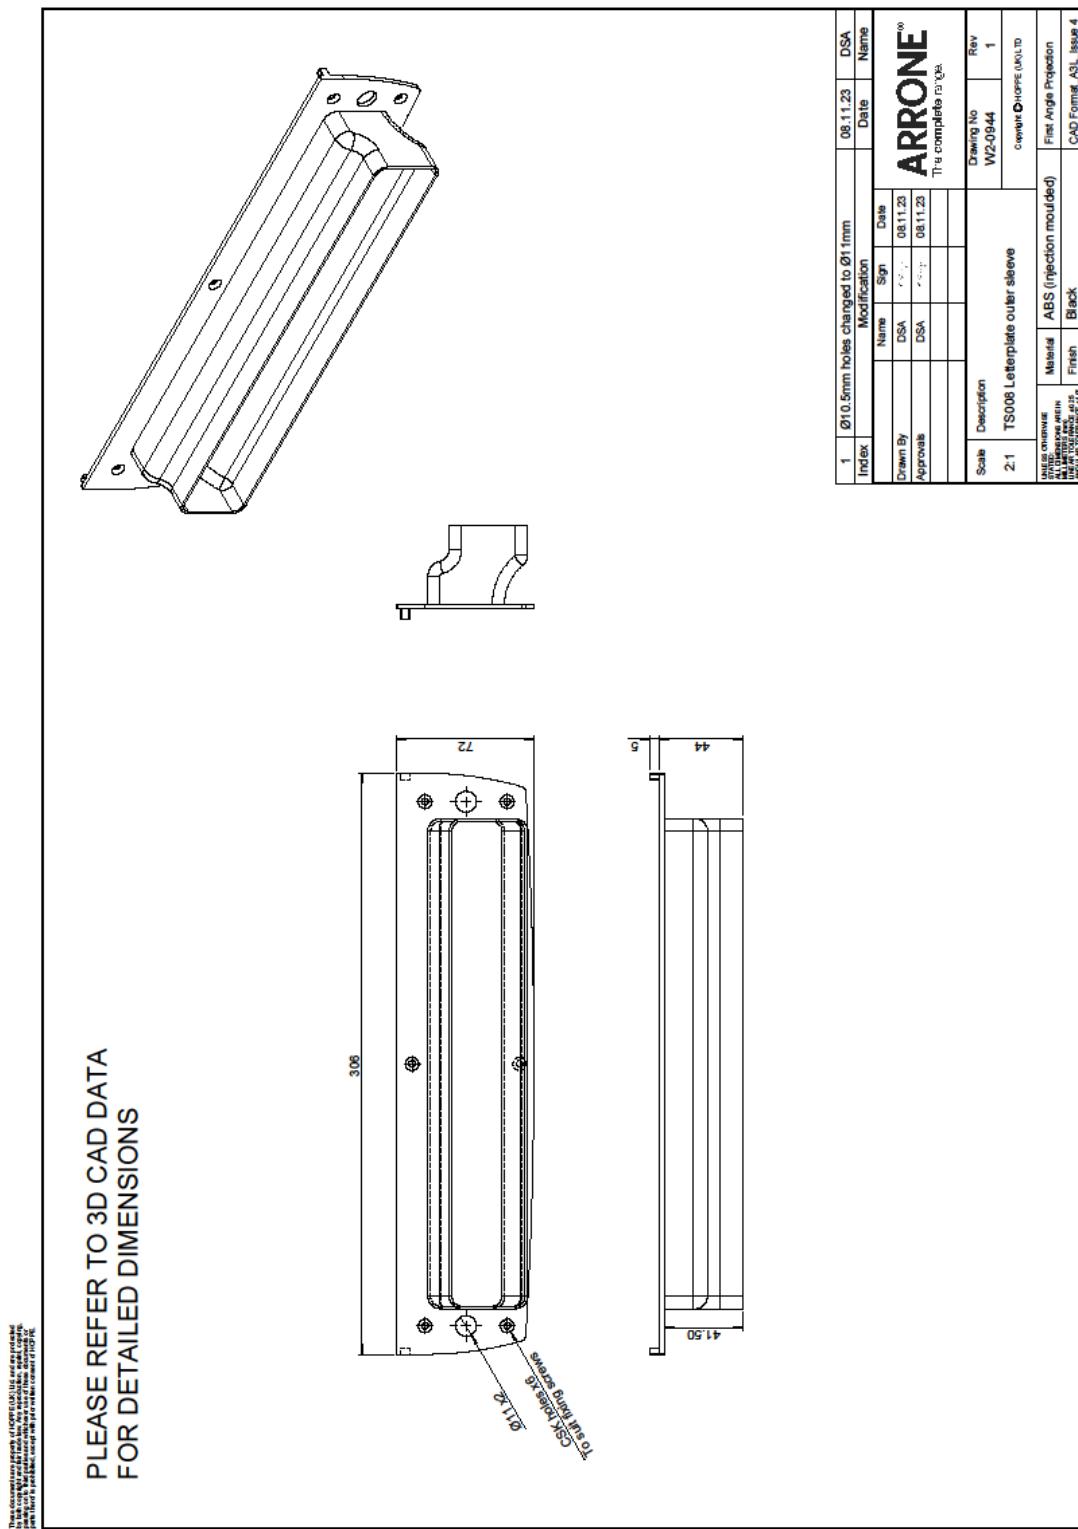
Client Inward Drawings – Letterplate Outer Sleeve
